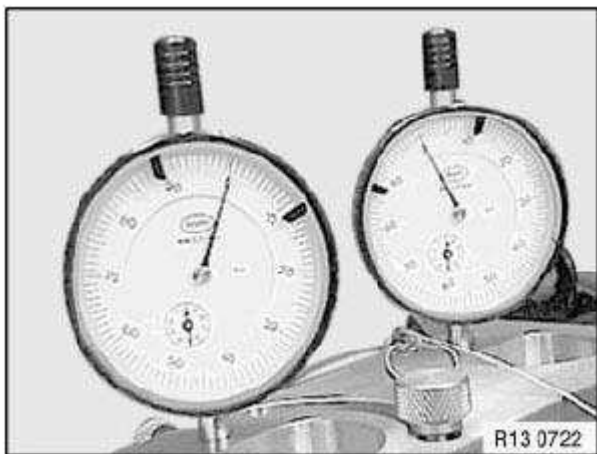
Identifying S62 Engine - Basic Throttle Setting
